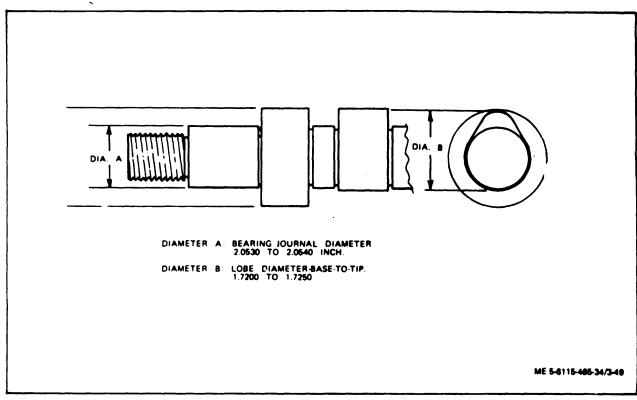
Dimensional Inspection of Camshaft
